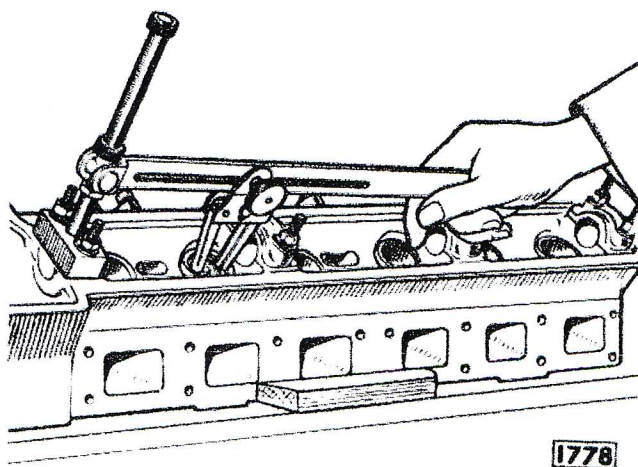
Fitting the valve springs utilizing the valve spring compressing tool Churchill tool No. J.6118.
